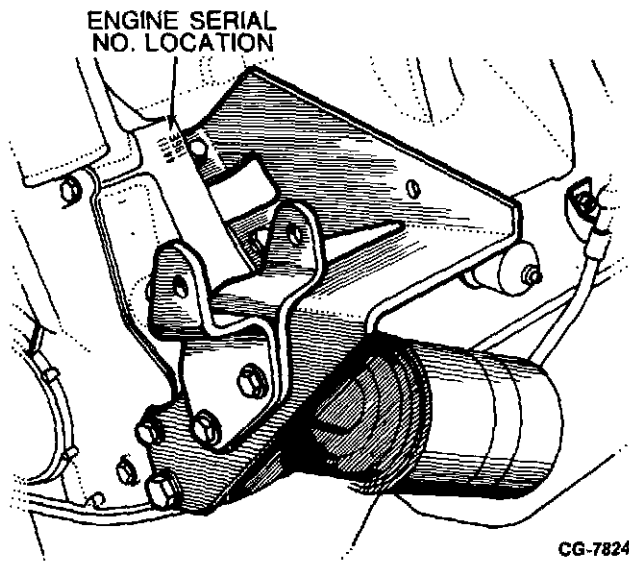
C-152, 196 ENGINES ON LEFT SIDE UPPER FRONT
